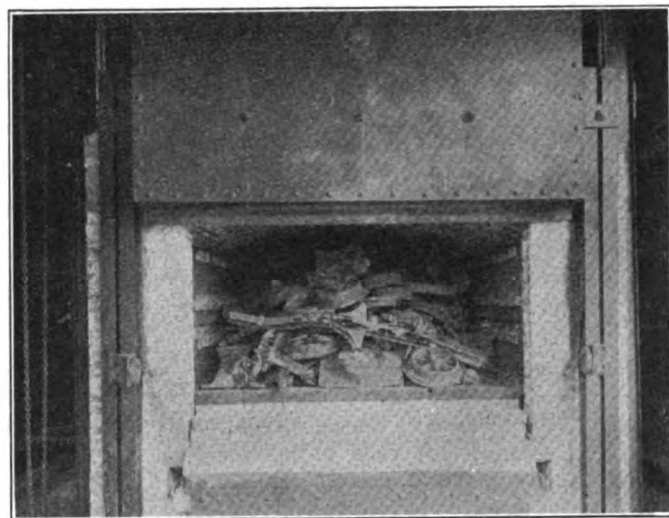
Car bottom direct heat furnace for annealing steel castings. 1600 deg. F. Weight of charge 8 tons. Inside dimensions $6\frac{1}{2}$ ft. wide, 9 ft. deep, 3 ft. high. Connected load 200 kw.
